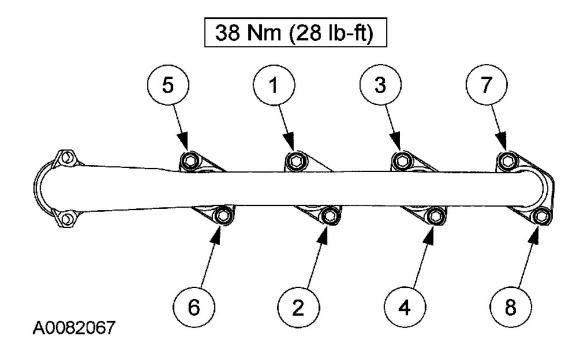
Identifying RH Exhaust Manifold Bolt Tightening Sequence With Torque Specification Courtesy of FORD MOTOR CO.
